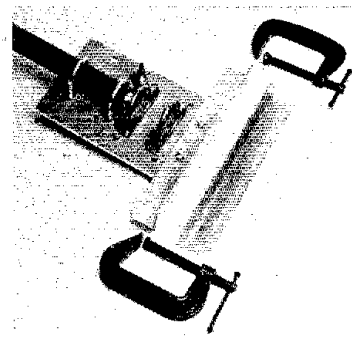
Photograph of the mounting plate showing two angle brackets and C clamps, which provide additional mounting possibilities.
